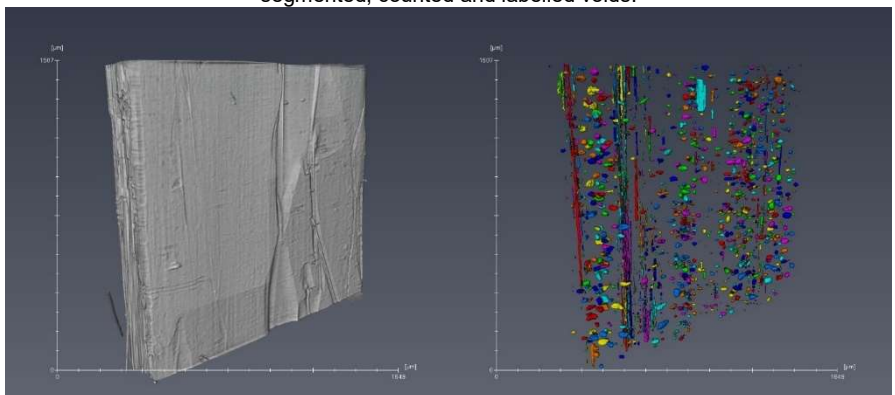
CGLS: at left hand side, reconstructed volume and at right hand side, segmented, counted and labelled voids.
